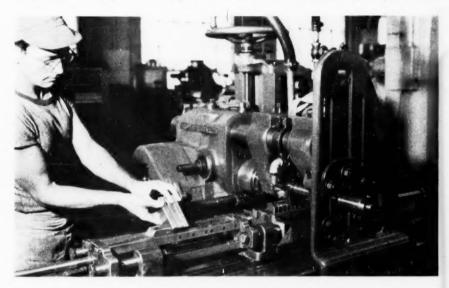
The ends of the side plates are milled in the Brown & Sharpe No. 12 milling machine shown here.
